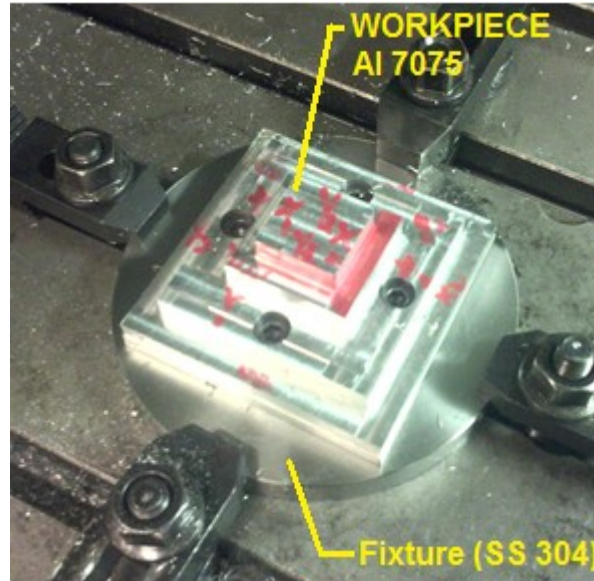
WORKPIECE AND FIXTURE PLACEMENT
